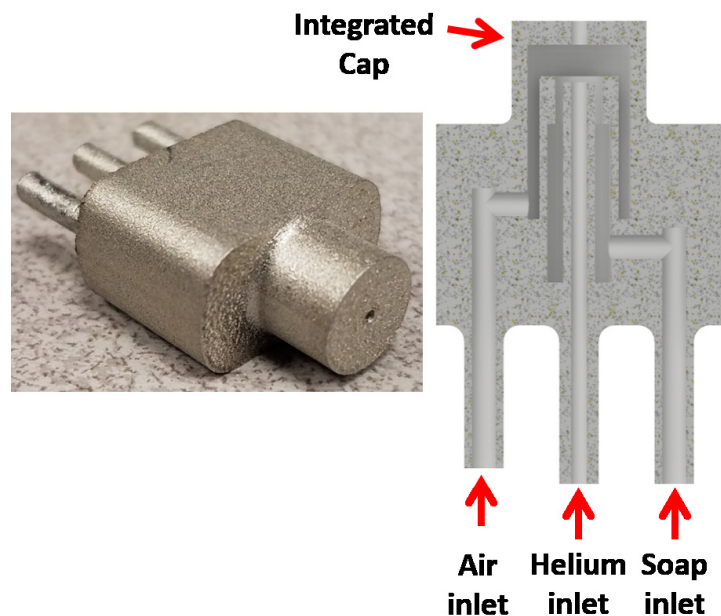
HFSB integrated cap and nozzle design picture (left) and shaded section drawing of the nozzle (right)
